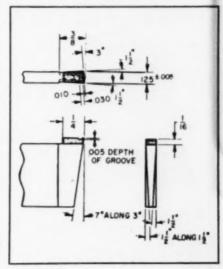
Carbide cut-off tool with standard groove type chip breaker.
